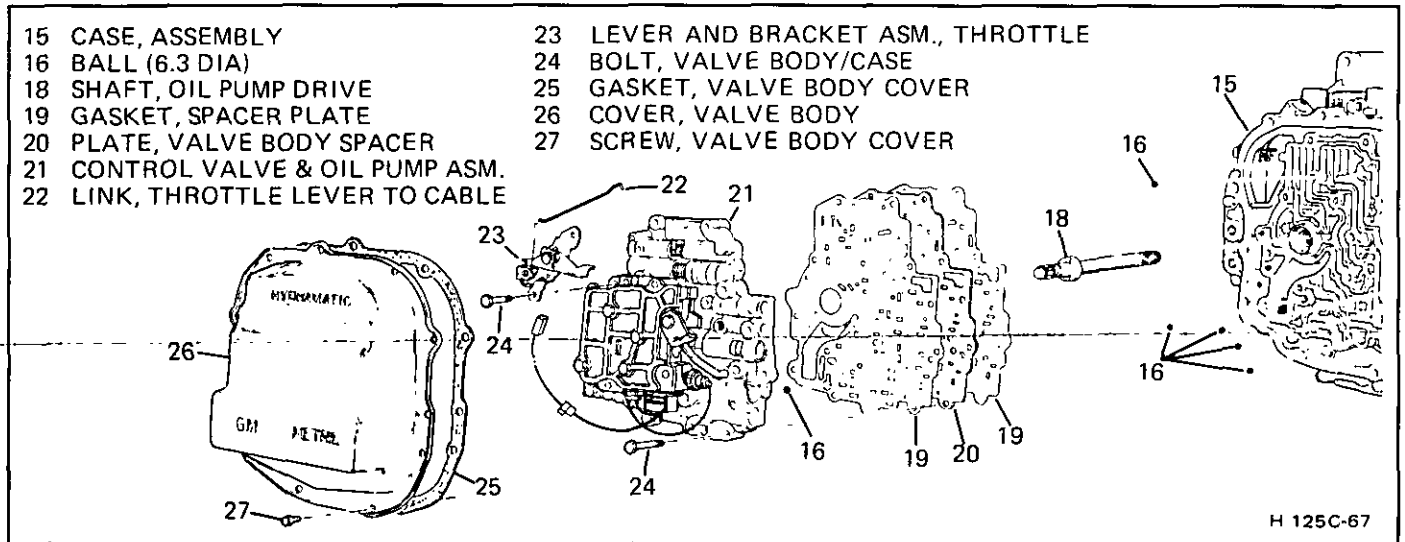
Control Valve Pump Assembly, Oil Pump Shaft
